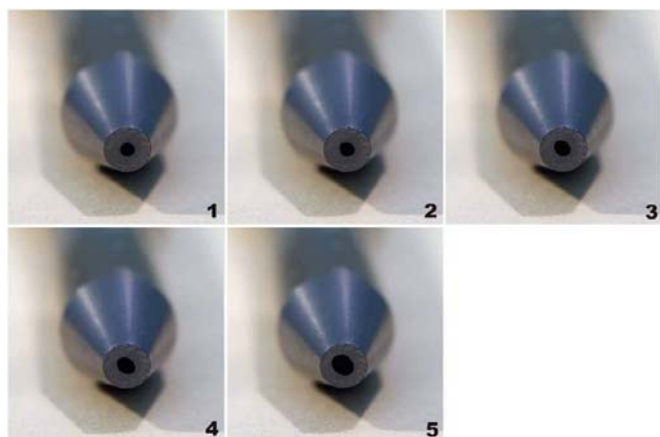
Wear profiles of the focusing tube – Premium Composite Carbide (photographical record performed at company DRC., ltd., Prešov, Slovak Republic).
